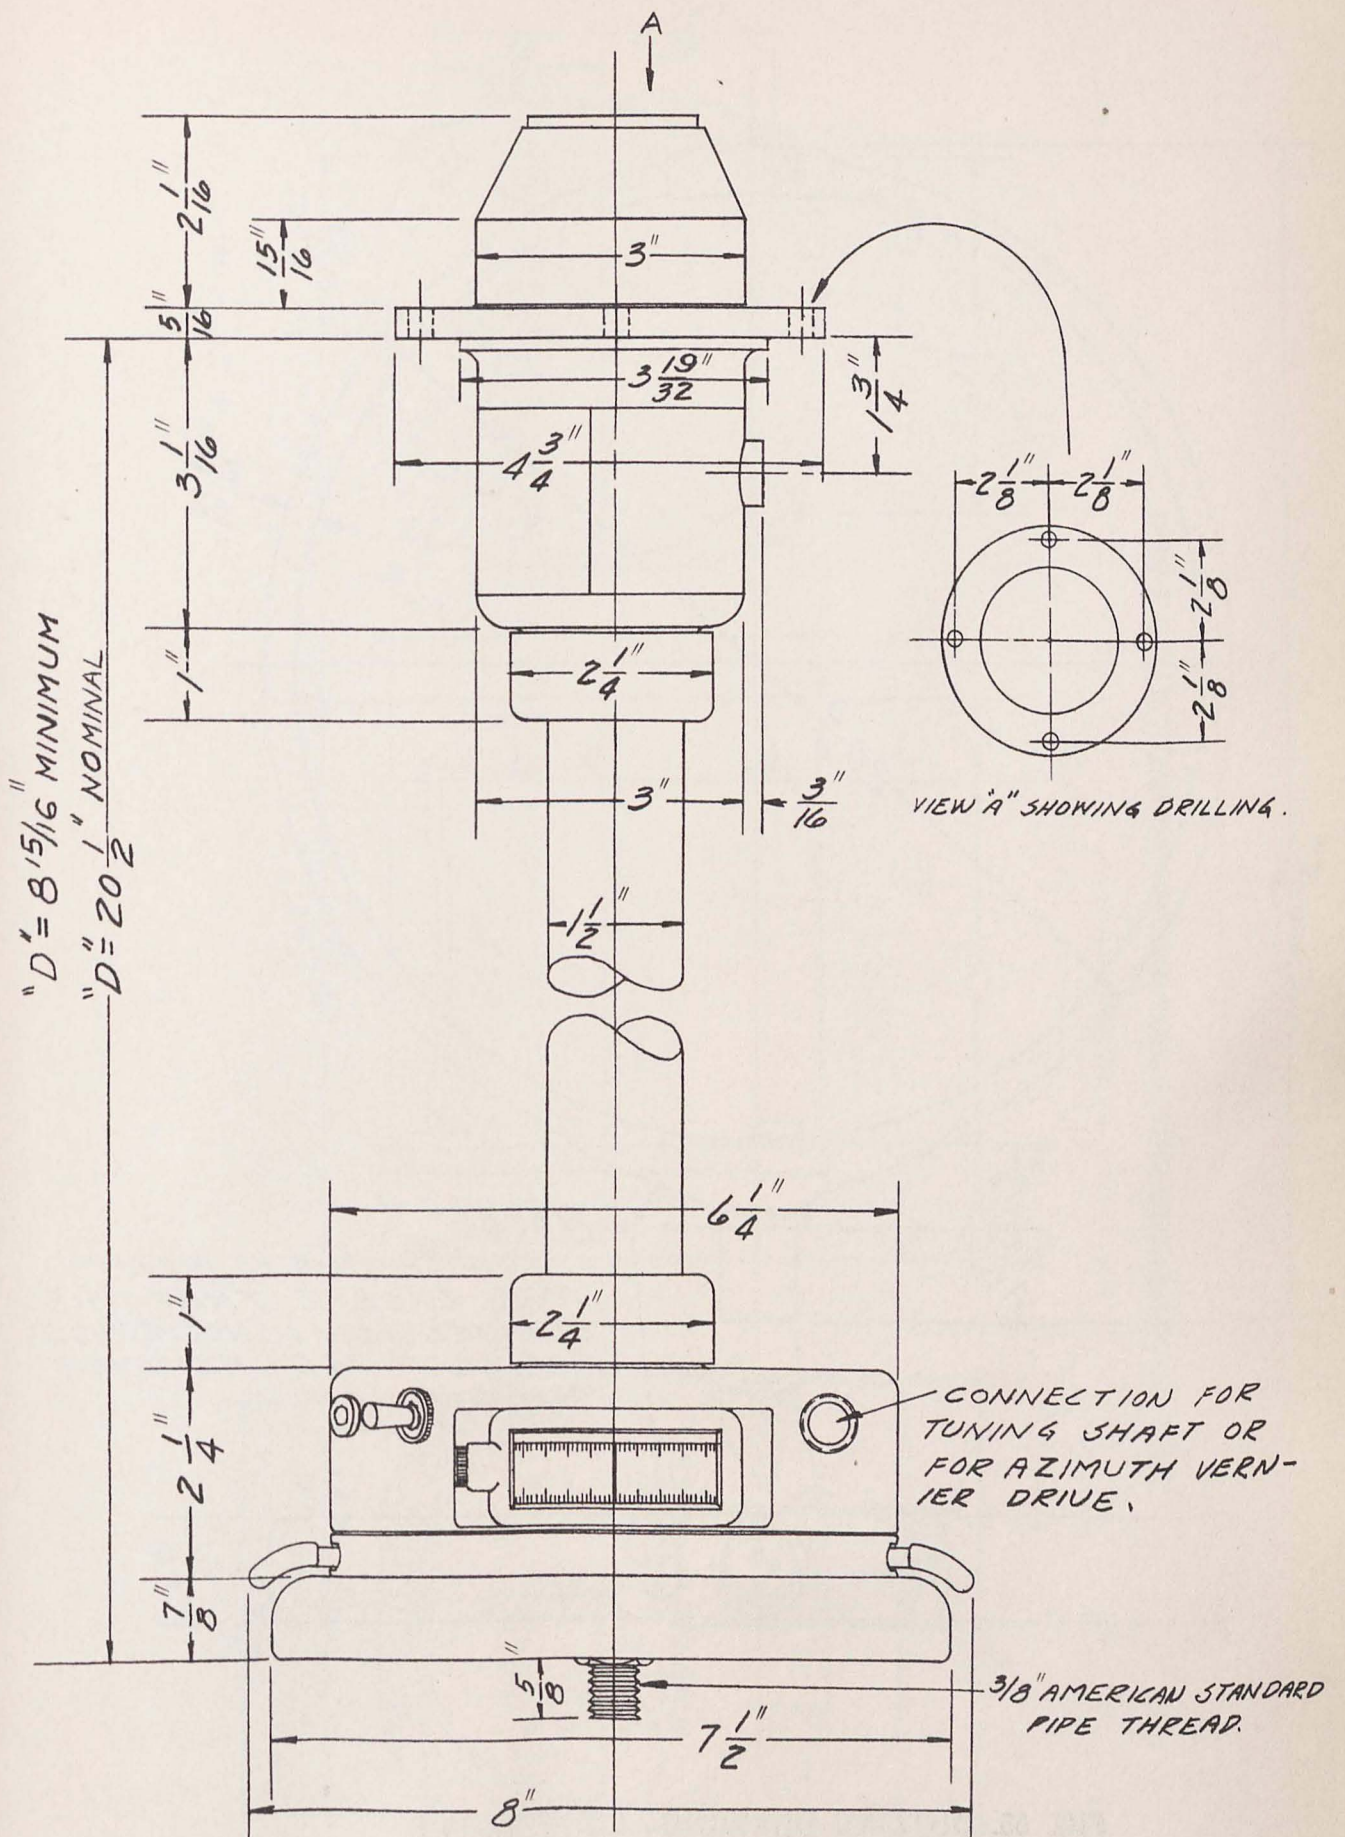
OUTLINE DRAWING—LOOP MOUNTING GS-8-B
